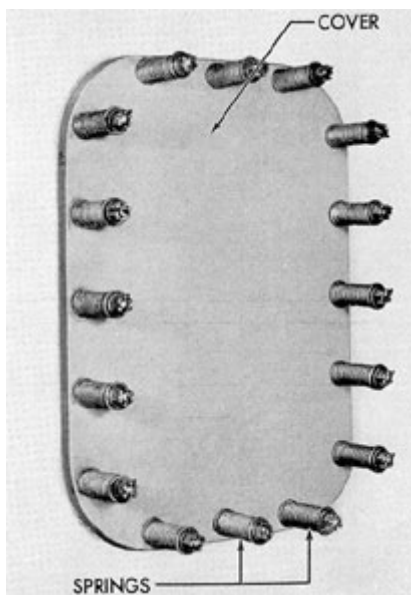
Vertical drive compartment spring-loaded access plate, F-M.
